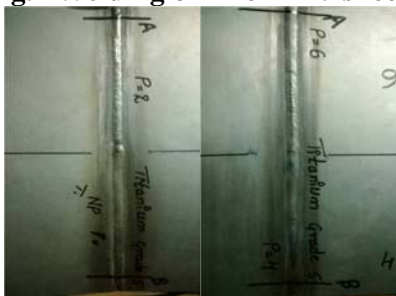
Welded pieces of Ti-6Al-4V
